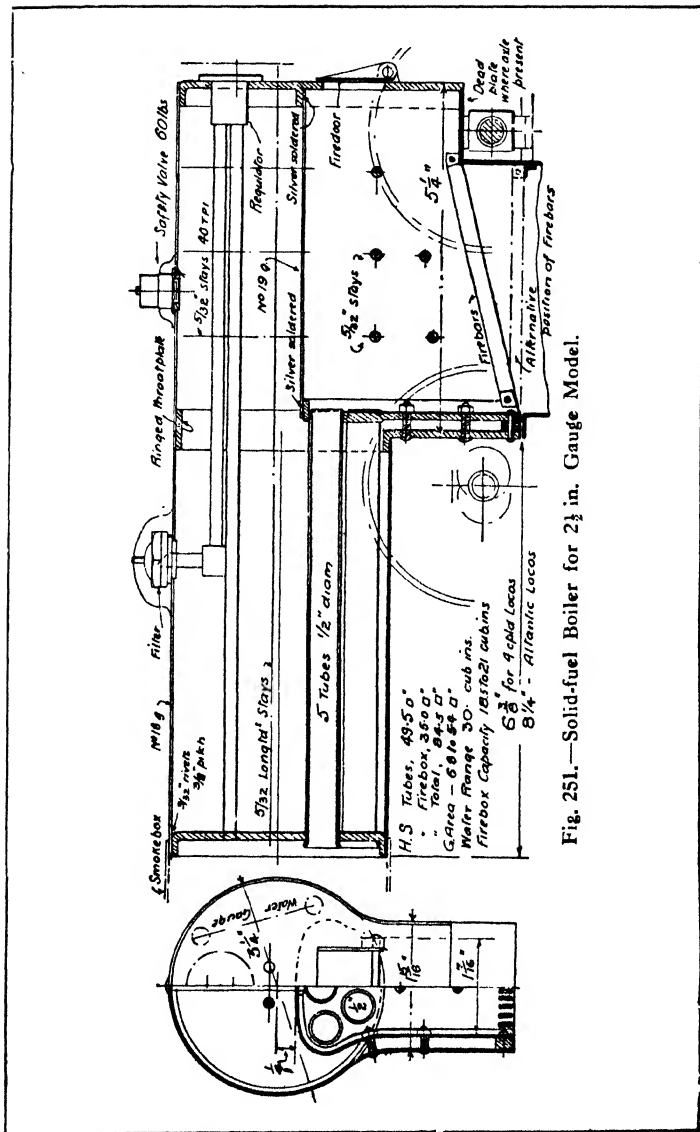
L.—Solid-fuel Boiler for 2½ in. Gauge Model.
